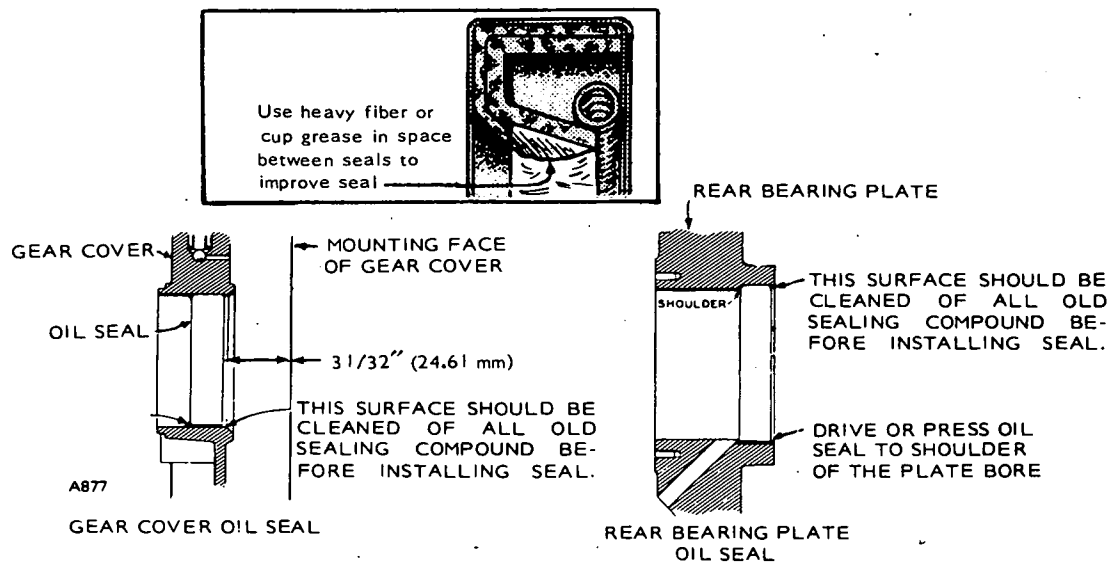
GEAR COVER AND REAR BEARING PLATE OIL SEALS
